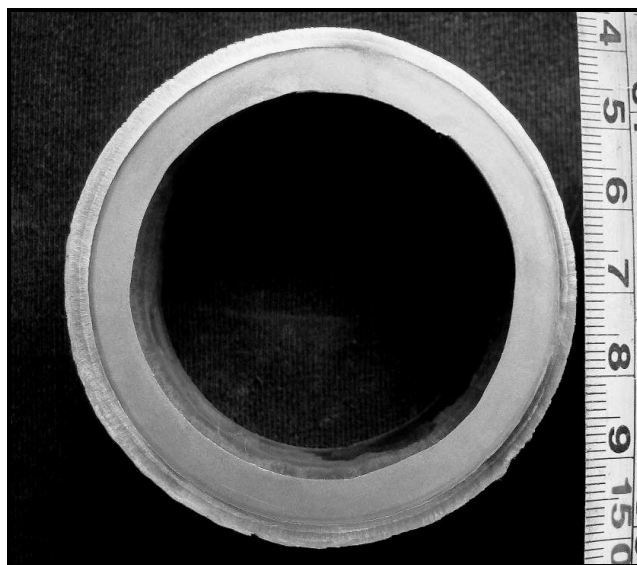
Cross section of cladded wall in horizontal position in protection of two-component gas
